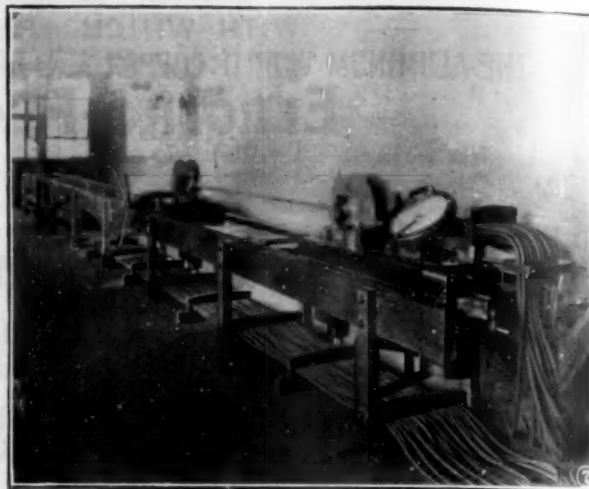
FRONT VIEW OF SNEAD HB-4 MACHINE FOR ELECTRICALLY ANNEALING ADMIRALTY BRASS CONDENSER TUBES
